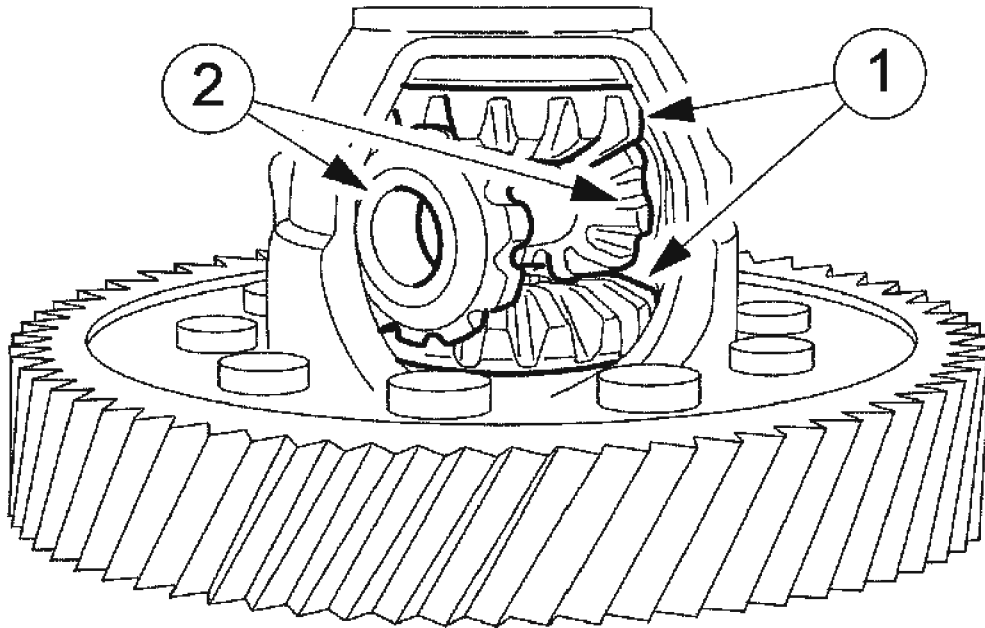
Lubricating Gears And Thrust Washers With Clean Automatic Transmission Fluid
